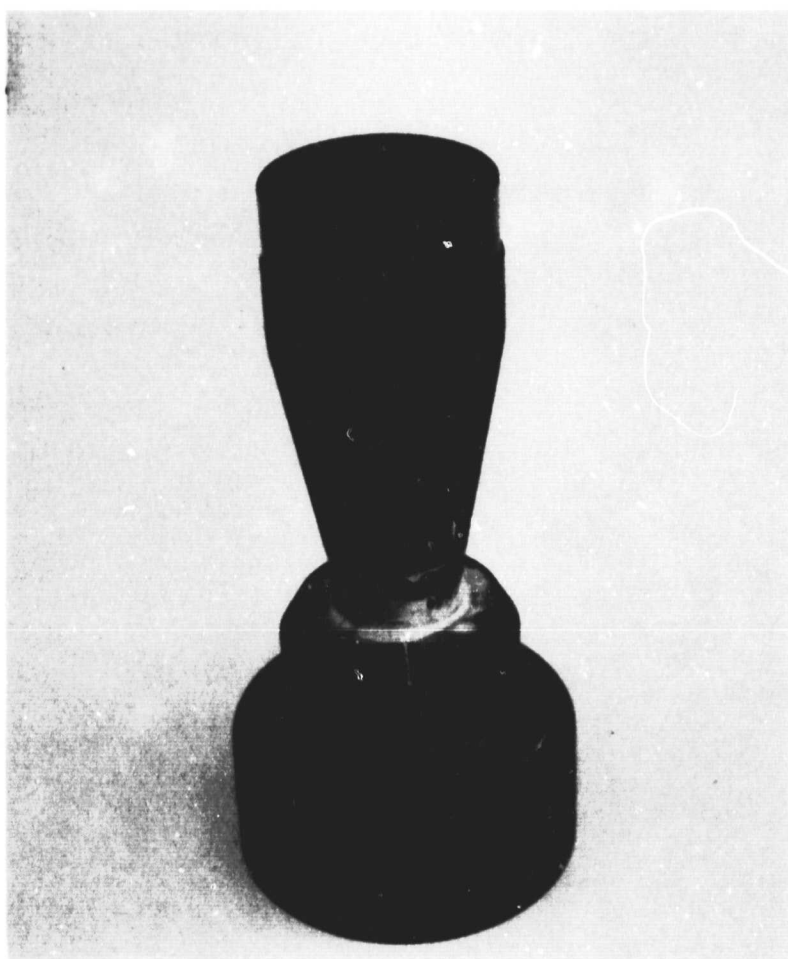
Side View of Orifice Plate Assembly Showing Exhaust Tube at Top.
